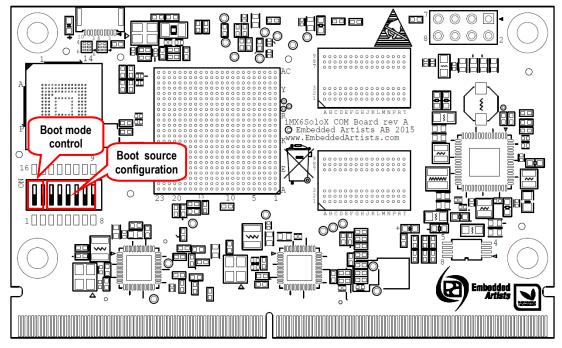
iMX6 SoloX COM Board Rev A Boot Control Slider Switches Location
